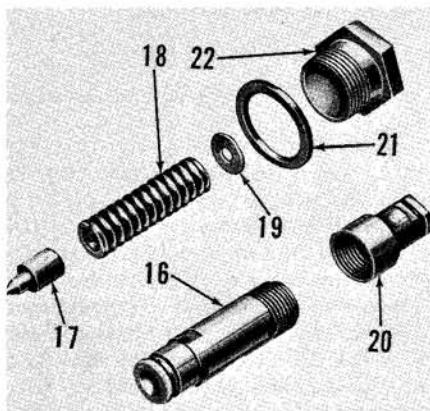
A — Exploded view of early production pressure relief valve assembly. Refer to Fig. FO568 for legend.
